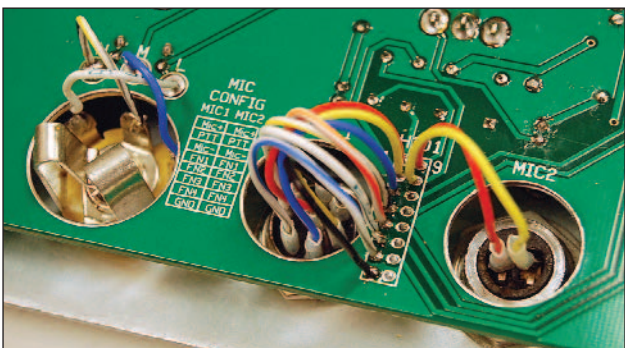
To minimize laborious point-to-point wiring, short jumper wires from front panel connectors solder to mating pads on the printed circuit board.
